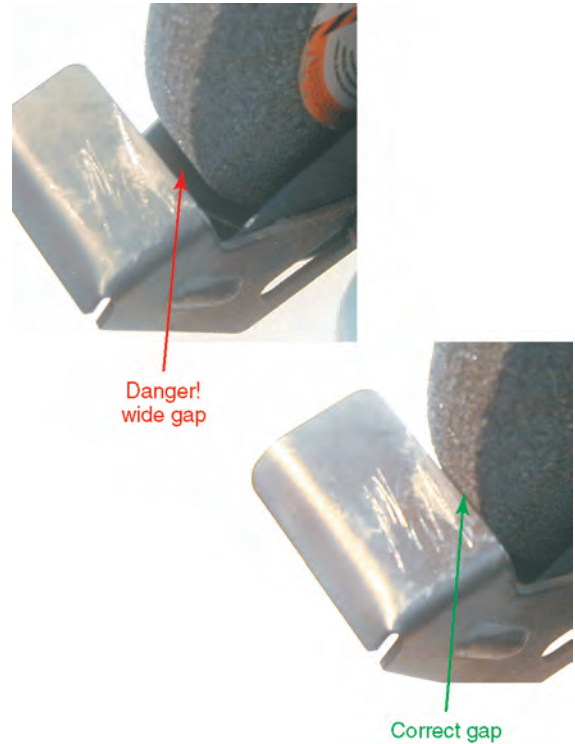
Due to grinding wheel wear, this tool rest gap has become dangerously wide and must be adjusted closer to the wheel to avoid pulling in small parts and fingers!
